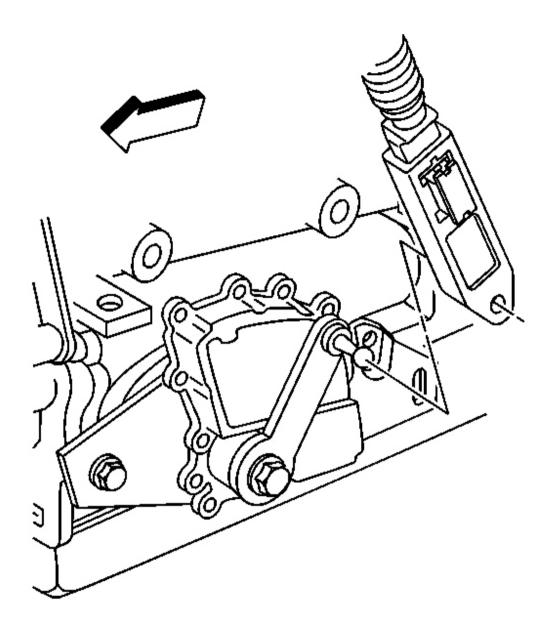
Transmission Shift Control Cable & Bracket Courtesy of GENERAL MOTORS CORP.
